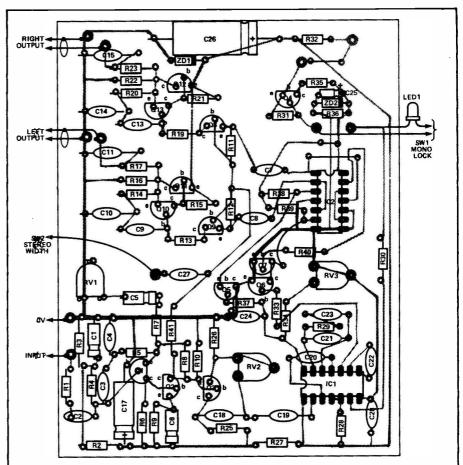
Component overlay for the stereo decoder PCB. Note that R18/C12 and R24/C16 are not mounted on the board.
